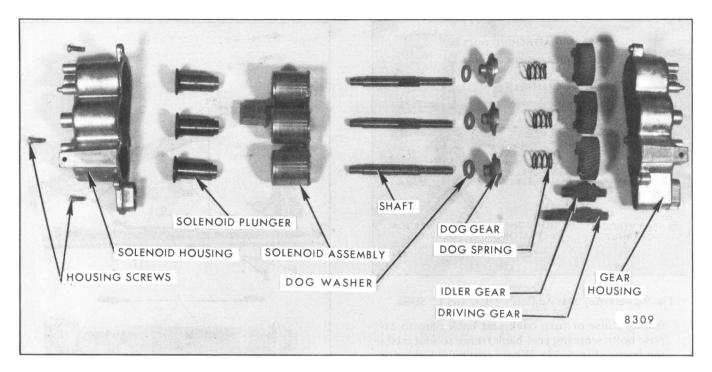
Six-Way Seat Adjuster Transmission Component Parts for 60-40, 50-50, 40-40 and Bucket Seats
